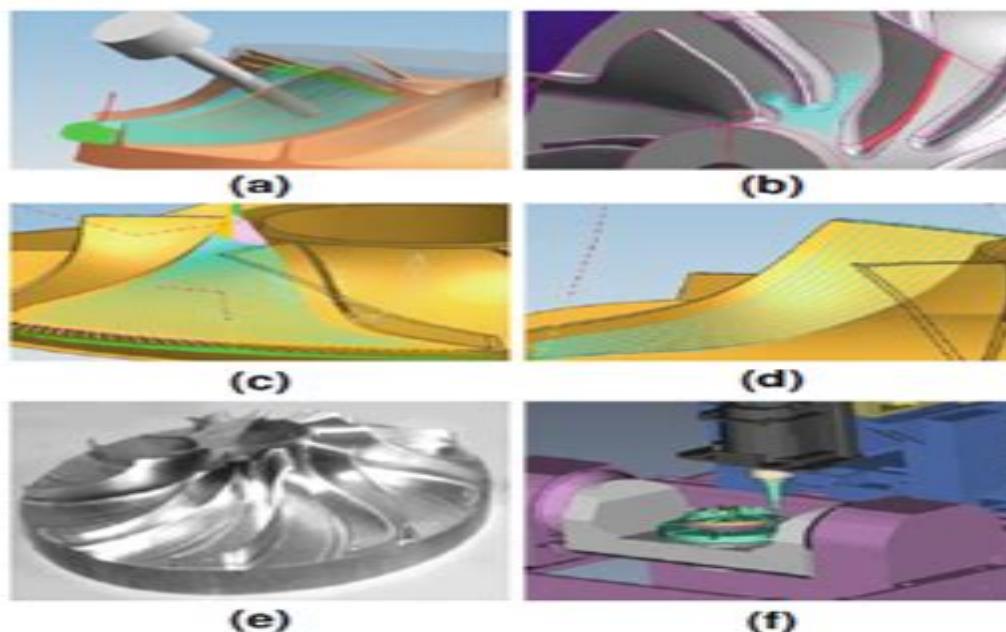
A compressor disk detail of the virtual simulation and CAM strategies in a 5-axis centre and machining conditions. a Rough milling, b rest milling, c hub finishing, d blade finishing, e final piece, f virtual verification
